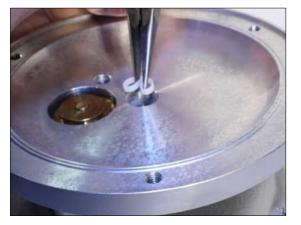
On TX70 up to TX820: Put in new o-rings (47) and shaft seals (36) in the grooves of the diaphragm shaft hole. To insert the shaft seal, bend it to a kidney shape.
